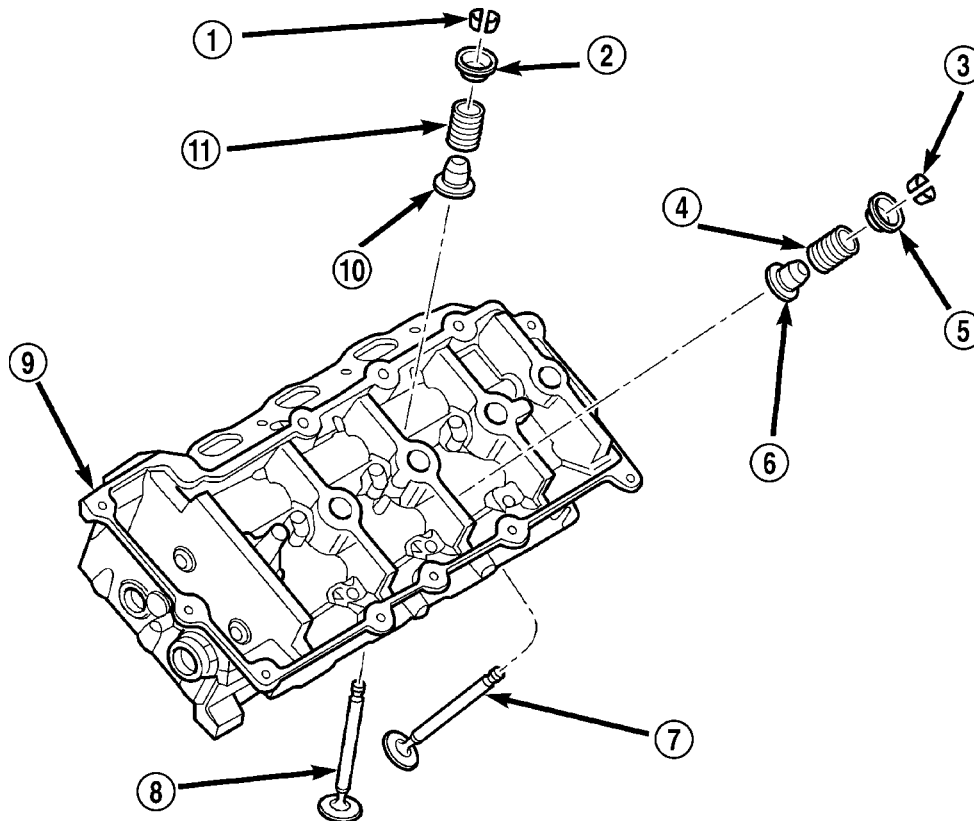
CYLINDER HEAD, VALVES, & SPRINGS
